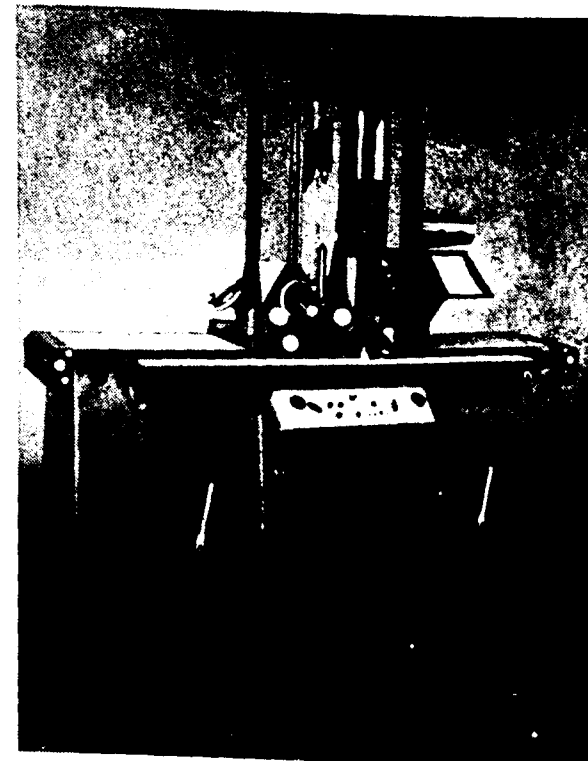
The Knauthe Hob Cutter Testing Machine.
